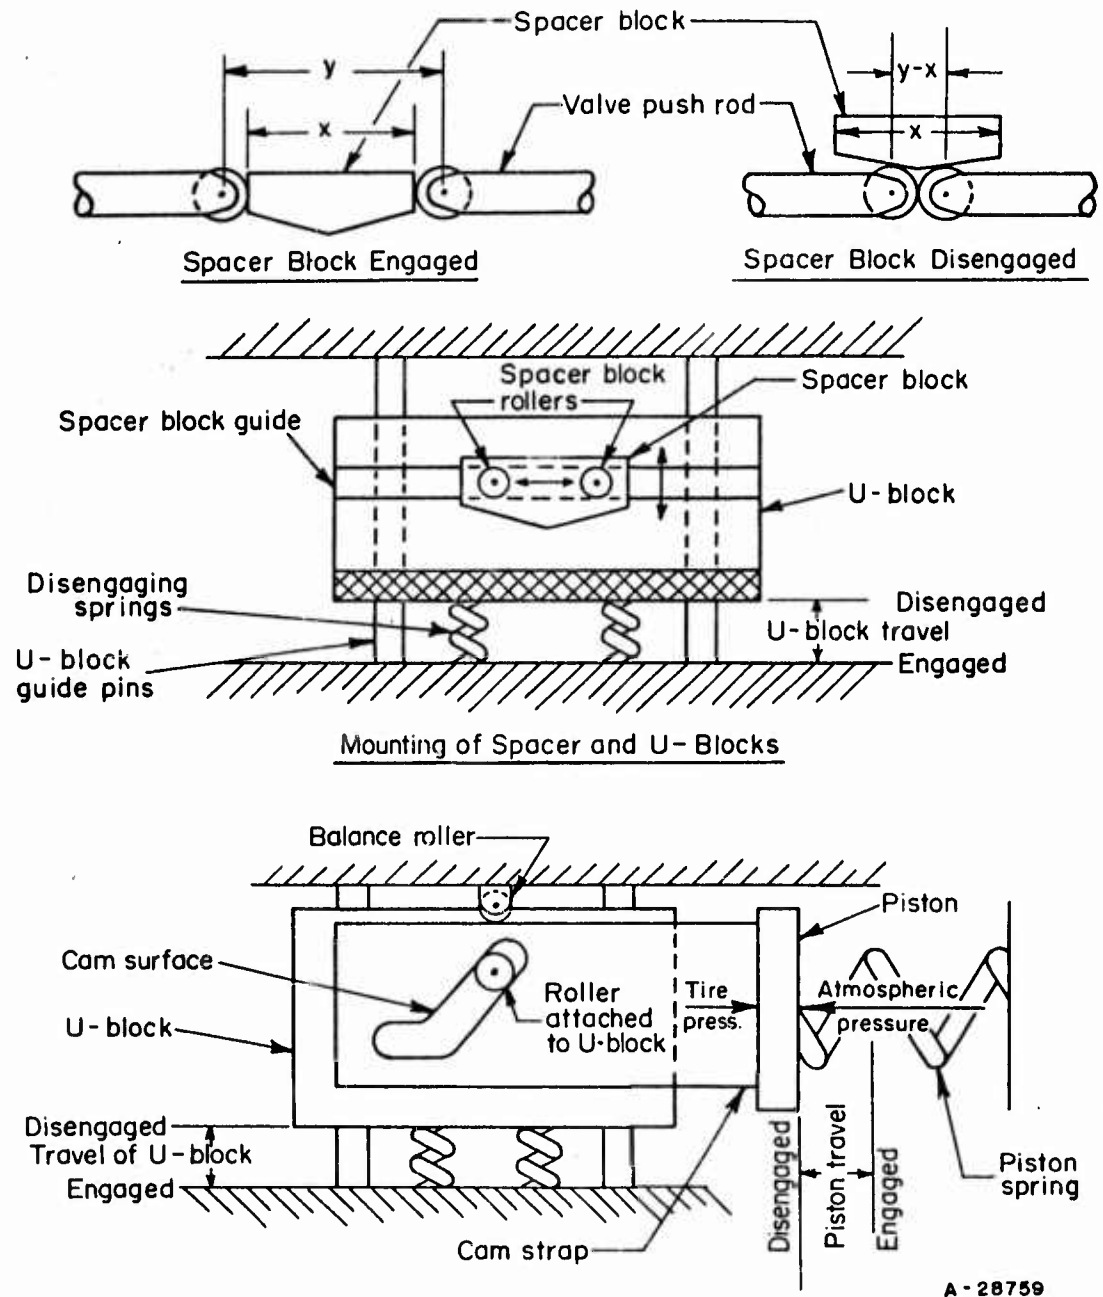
METHOD OF ENGAGING AND DISENGAGING SPACER BLOCK IN PRESSURE SENSOR
